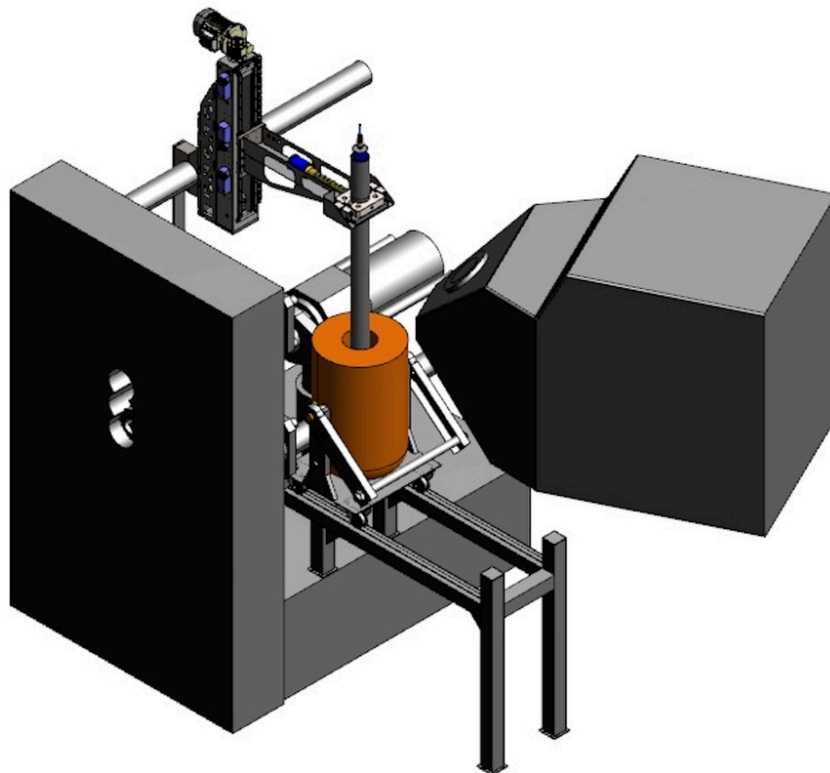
CAD design of MMM-Ultrasonic metal treatment unit
